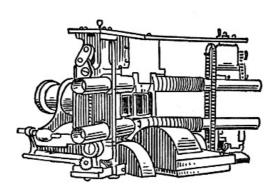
A STEEL PLATE ENGRAVING MACHINE One boy does the work of four men
